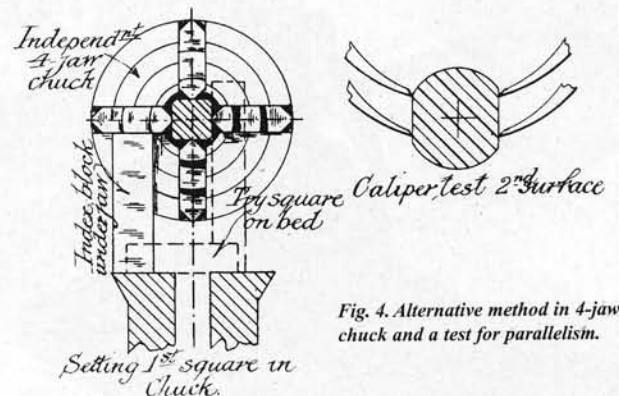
Alternative method in 4-jaw chuck and a test for parallelism.
